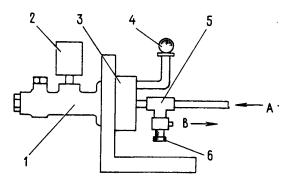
Checking Rear Sealing Ring for Tightness:
